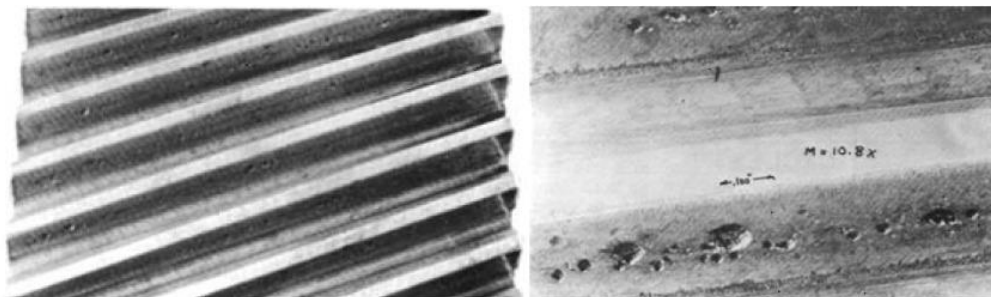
(a) Initial pitting (b) Enlarged photo [3]
